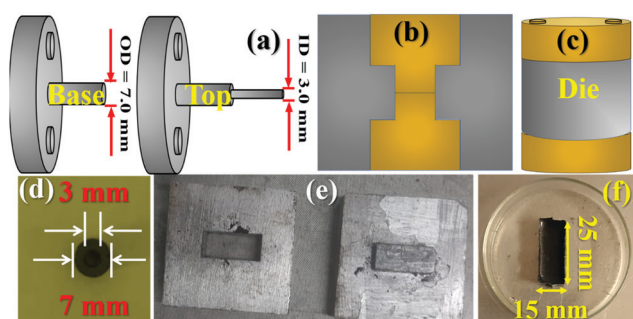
Top row: Design and drawing of (a) top/base mould components indicating the geometry of the prong, (b) cross-section of the mould, and (c) pressing-ready die. Bottom row: Typical photographs recorded for (d) fabricated toroidal-shaped specimen (post-polished stage) for co-axial mode studies, (e) rectangular mould to be loaded with NC/FNC nanocomposite, and (f) cured and unpolished rectangular specimen for the waveguide measurements.
